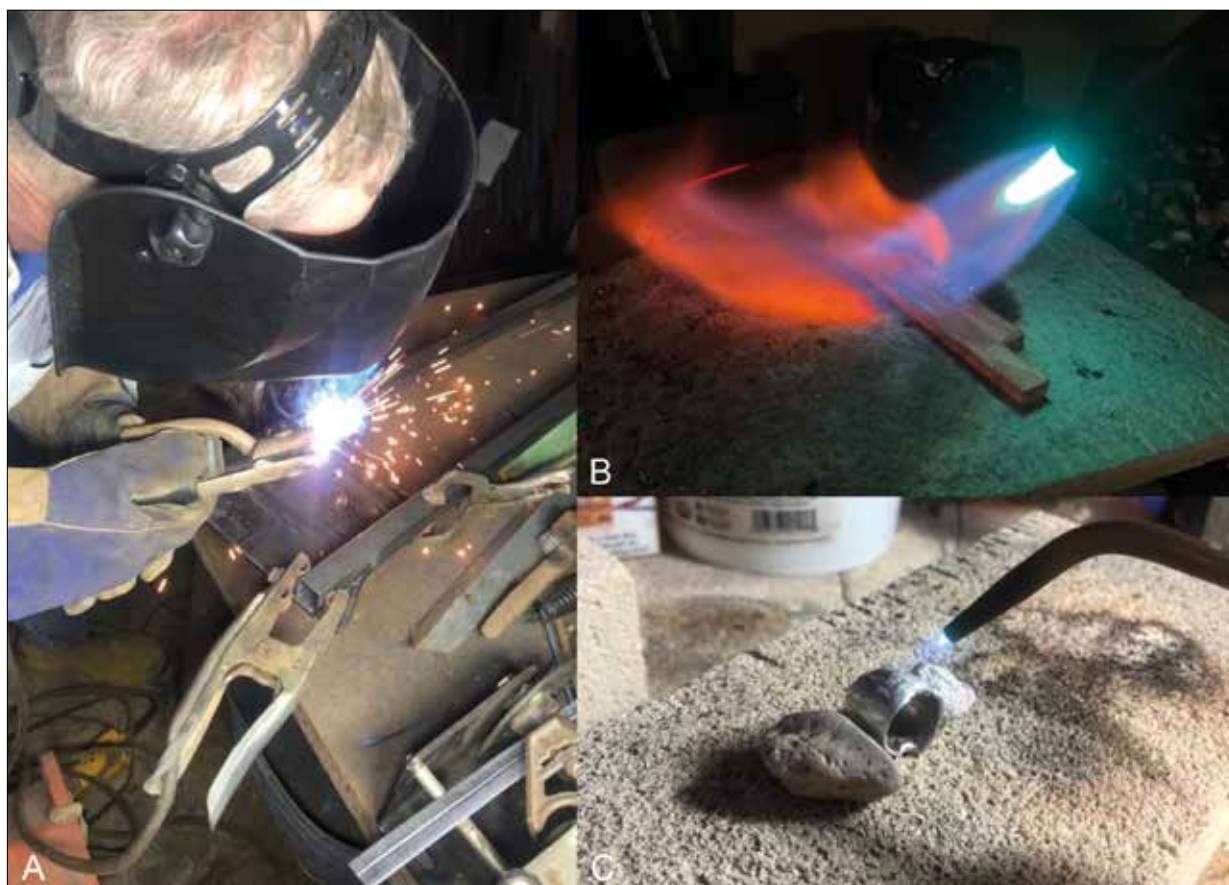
A – Kent Heimer welding with an arc welder; B – brazing a piece of brass (note flame size); C – welding a piece of pewter with (a relatively cooler) tiny flame (photo by Kent Heimer/Dawn Hoffmann).
